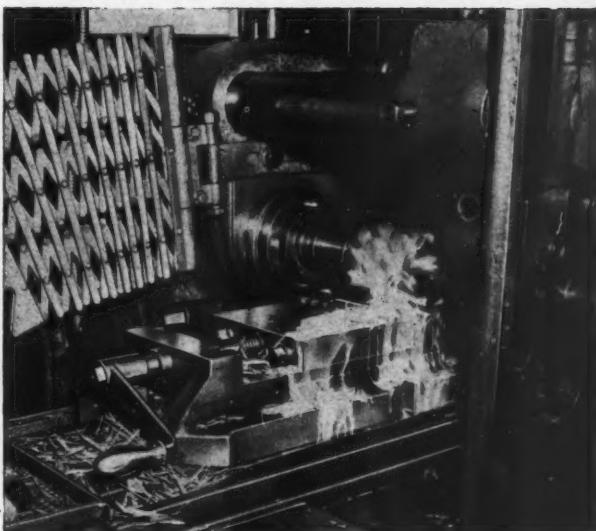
(above) A Brown & Sharpe No. 12 machine set up for cutting a step in an En.8 workpiece with a high-rake slab mill
